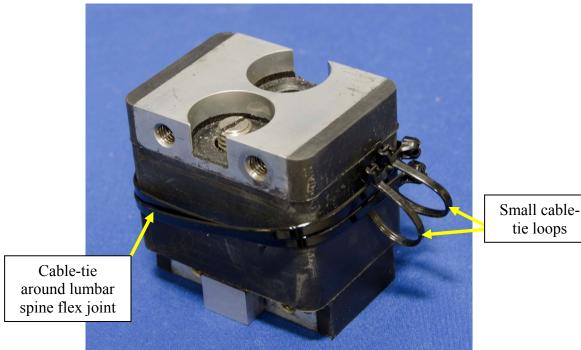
Install lumbar flex joint cable assembly into molded lumbar spine flex joint
